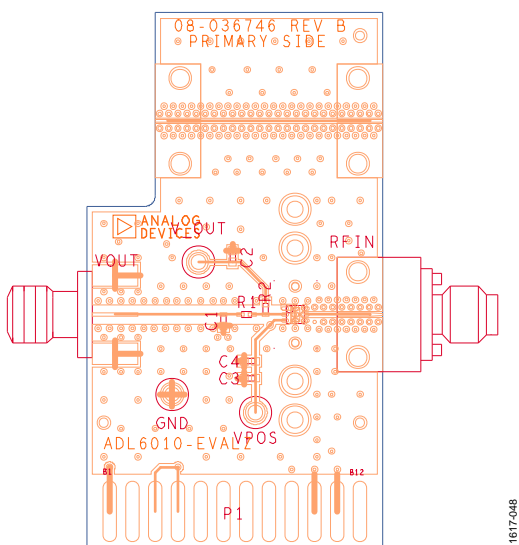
ADL6010 Evaluation Board Layout, Top Side
